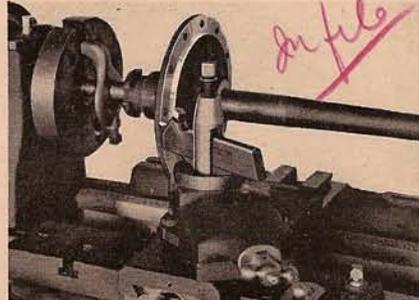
Truing a Damaged Rear Wheel Hub Flange using Axle to Mount between Centers.
